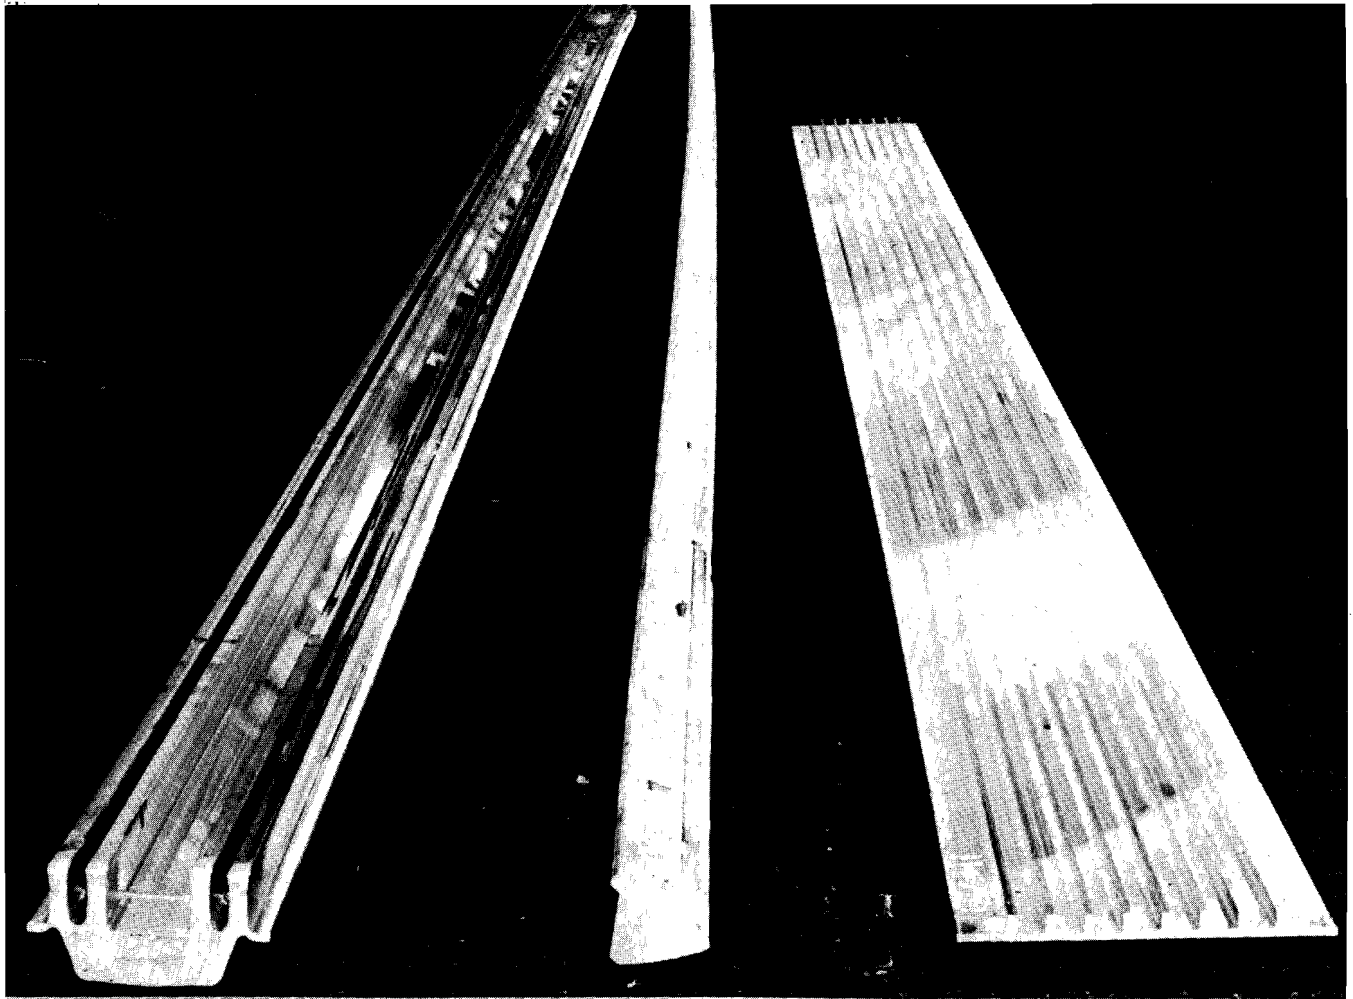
ALUMINUM ALLOY WING CARRYTHROUGH, STEPPED, AND INTEGRALLY STIFFENED PANEL EXTRUSIONS USED IN AIRCRAFT CONSTRUCTION
